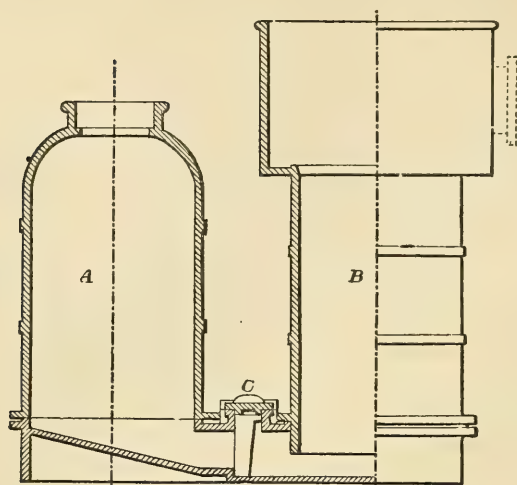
Condenser and Air Pump, with Foot-valve Seating.
